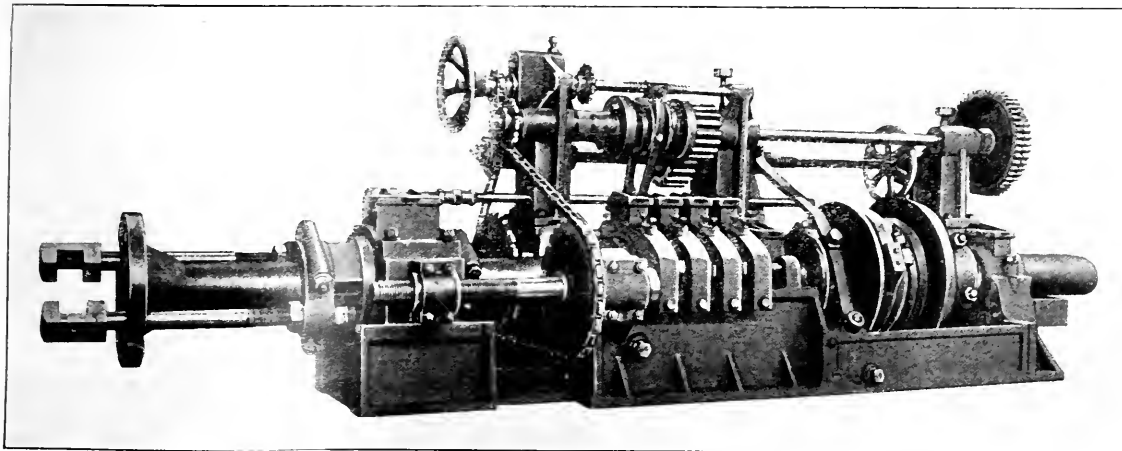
MECHANISM AND THRUST BLOCK FOR OPERATING REVERSING-BLADE PROPELLER
